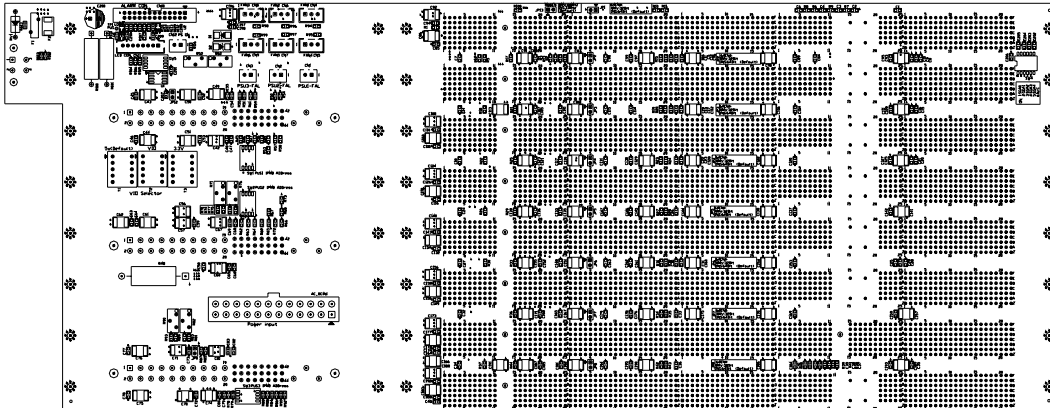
The connector and jumper locations on the rear side. (MIC-3042B)
